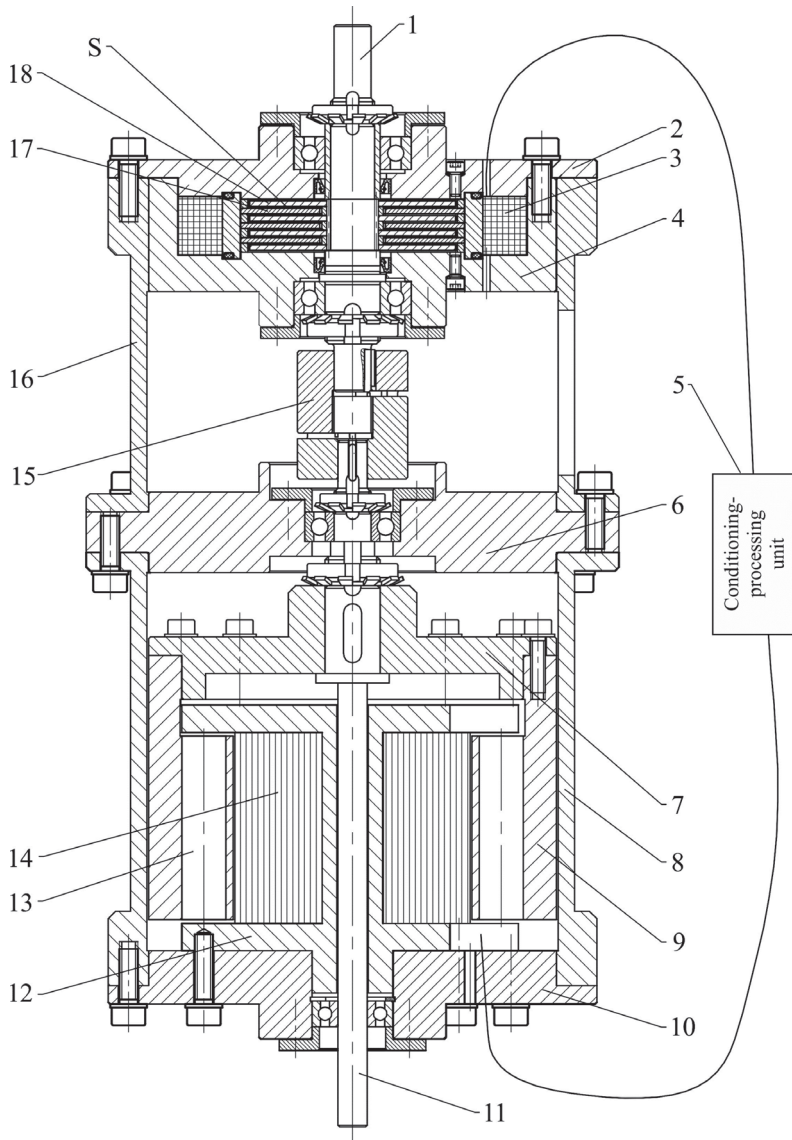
Structure of a rotary MR damper with energy harvesting capability: 1 – shaft; 2 – damper lid; 3 – damper coil; 4 – frame; 5 – signal conditioning-processing system; 6 – plate; 7 – rotary frame; 8 – housing; 9 – sleeve; 10 – transducer cover; 11 – shaft in the transducer coil; 12 – pole pieces; 13 – permanent magnets; 14 – transducer frame; 15 – coupling; 16 – sleeve; 17 – immobile disc; 18 – rotating disc; S – slit
